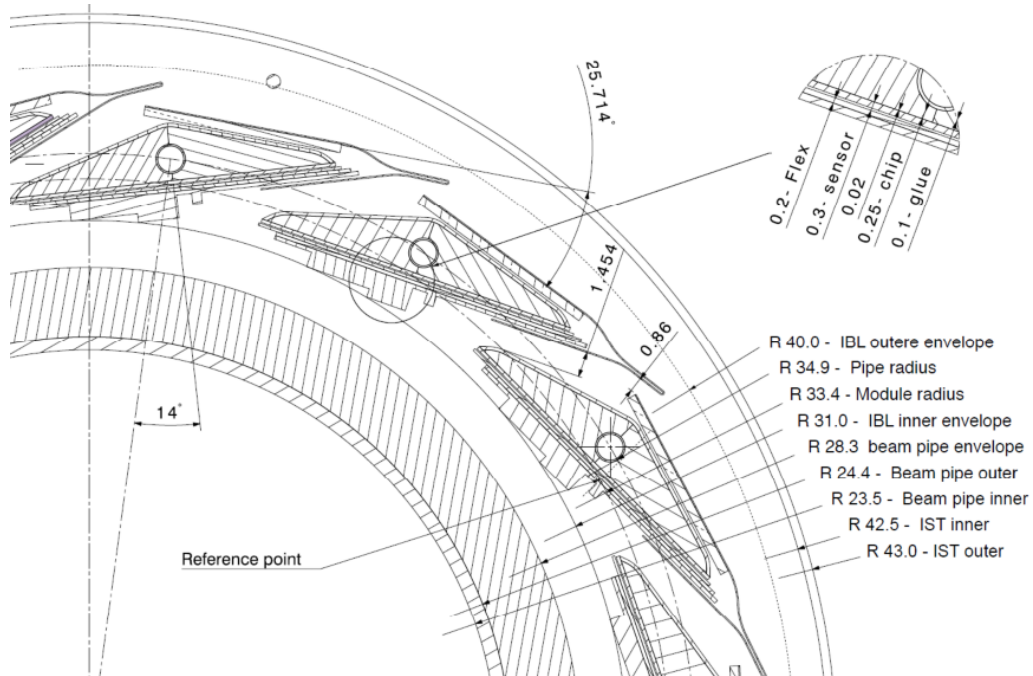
Radial view of IBL layout: the staves are mounted between the beampipe and the IBL Support Tube (IST).
